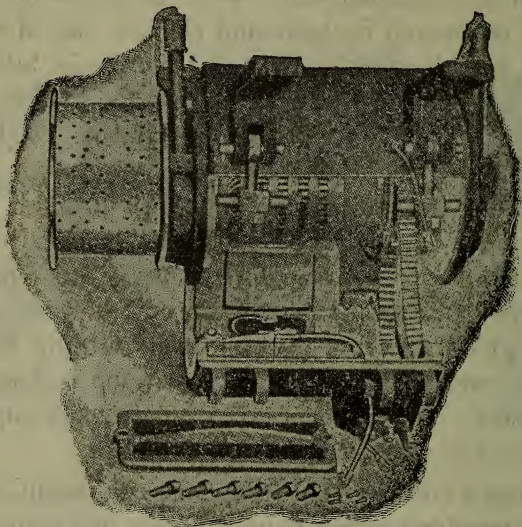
SIDE VIEW OF GENERATOR SHOWING LOWER FRAME SWUNG DOWN, EXPOSING INTERNAL PARTS, ARMATURE REMAINING IN UPPER FRAME.
